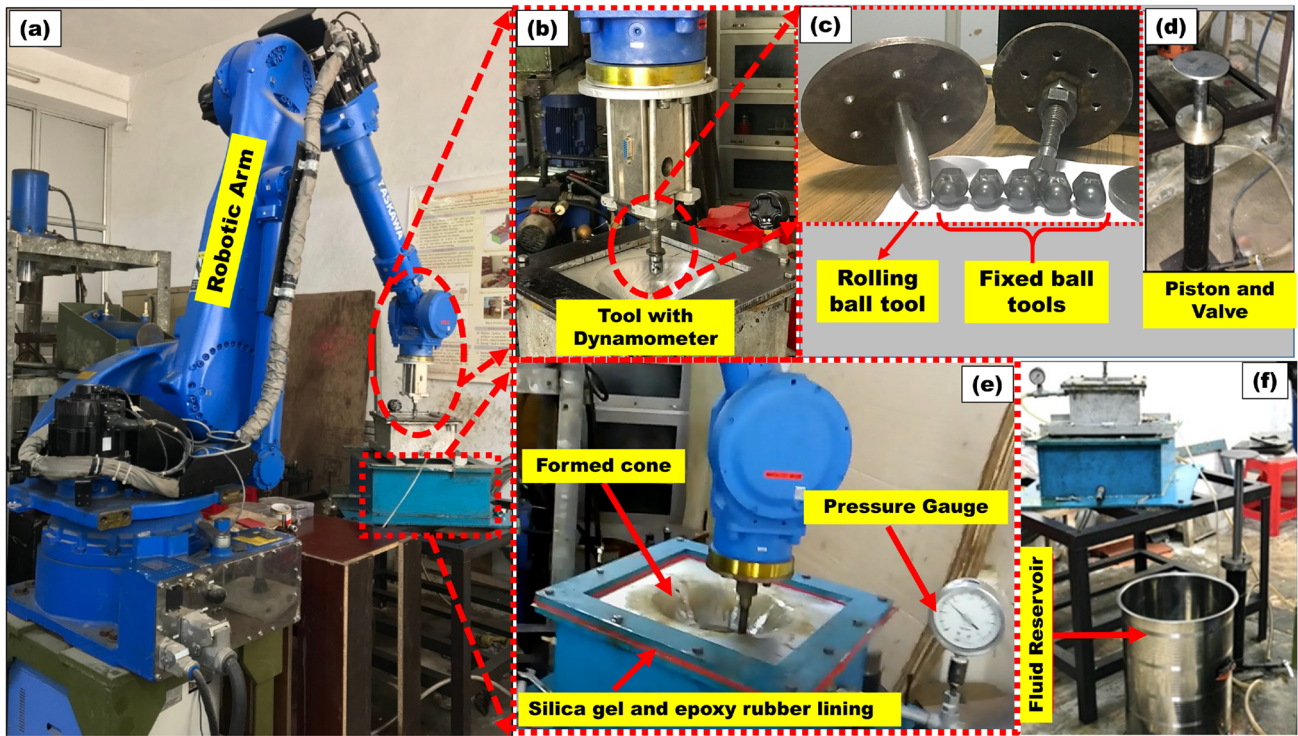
RAISHF setup: (a) developed setup at IIT(BHU), (b) forming tool with tool dynamometer (c) different tools fabricated (d) piston and valve arrangement (e) fabricated cone with leak-proof fluid chamber (f) fluid reservoir
